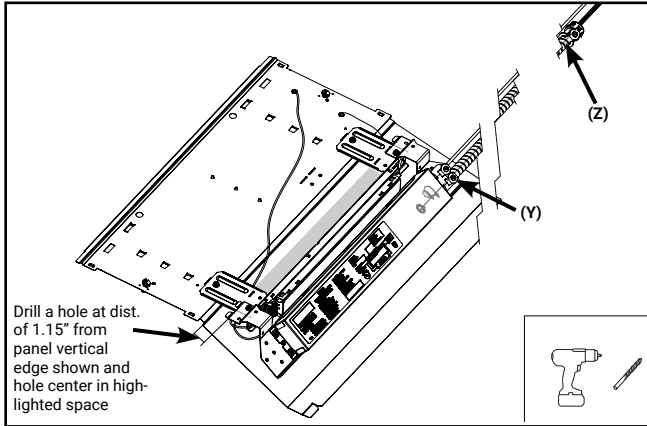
Drilling 9/16" diameter hole for test switch installation on backside of fixture
